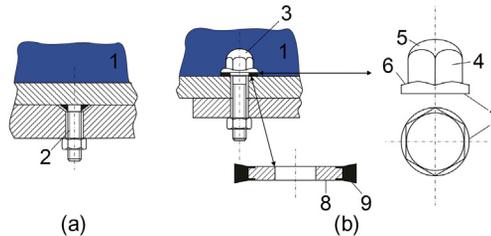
(a) To prevent crevices at the product side (1), screws, pins or a stud welded on the non-product side (2) should be used. (b) A bold head (3) that is hexagonal (4), domed (5) and provided with a sloped circular collar (6, 7) is easily cleanable, and the metal-backed (8) elastomer gasket (9) is used to seal the thread (Lelieveld et al., 2003; Hauser et al., 2004b).
